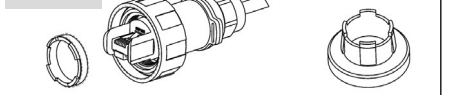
• Pull up the connector body and locate the carrier. The carrier sits into a 'D' shape aperture in the connector body, ensure it is seated correctly. Locate locking ring and tighten ring to retain insert, using the assembly tool provided.
